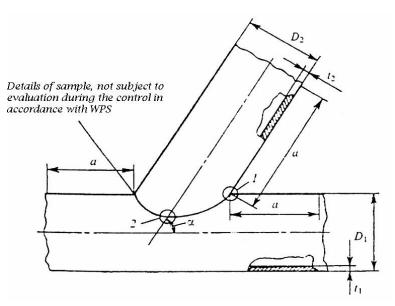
Test assembly of pipes joint made with a fillet weld and the diagram of test specimens cutting-out:
